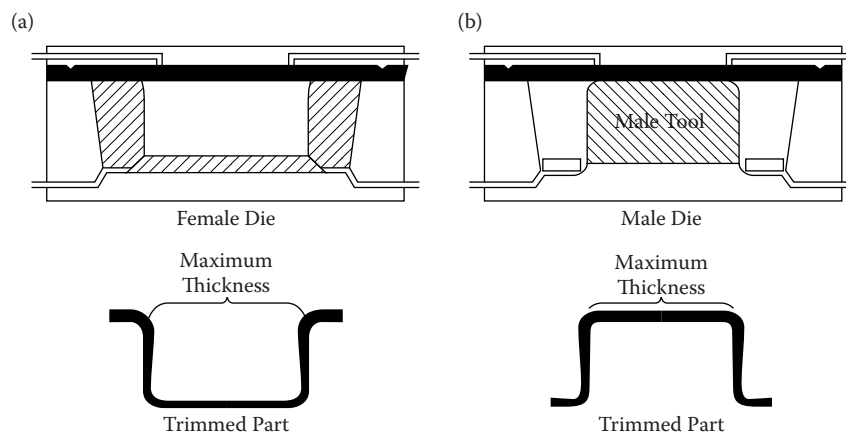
Illustration of (a) simple female forming; (b) drape forming.^[47]
